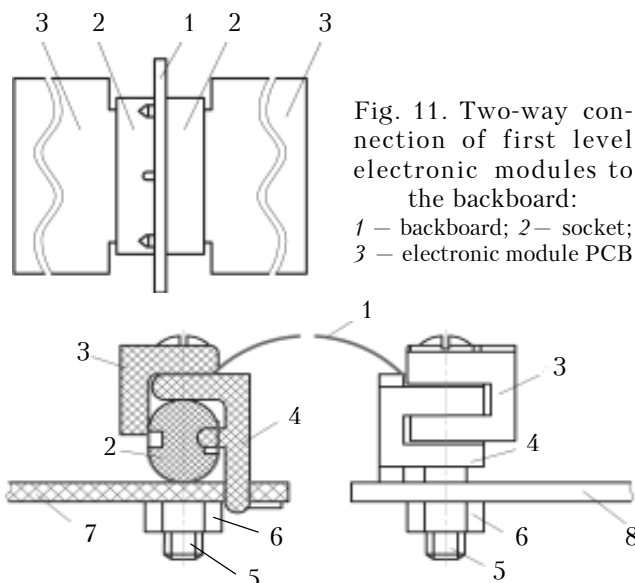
Two-way connection of first level electronic modules to the backboard: 1 – backboard; 2 – socket; 3 – electronic module PCB
